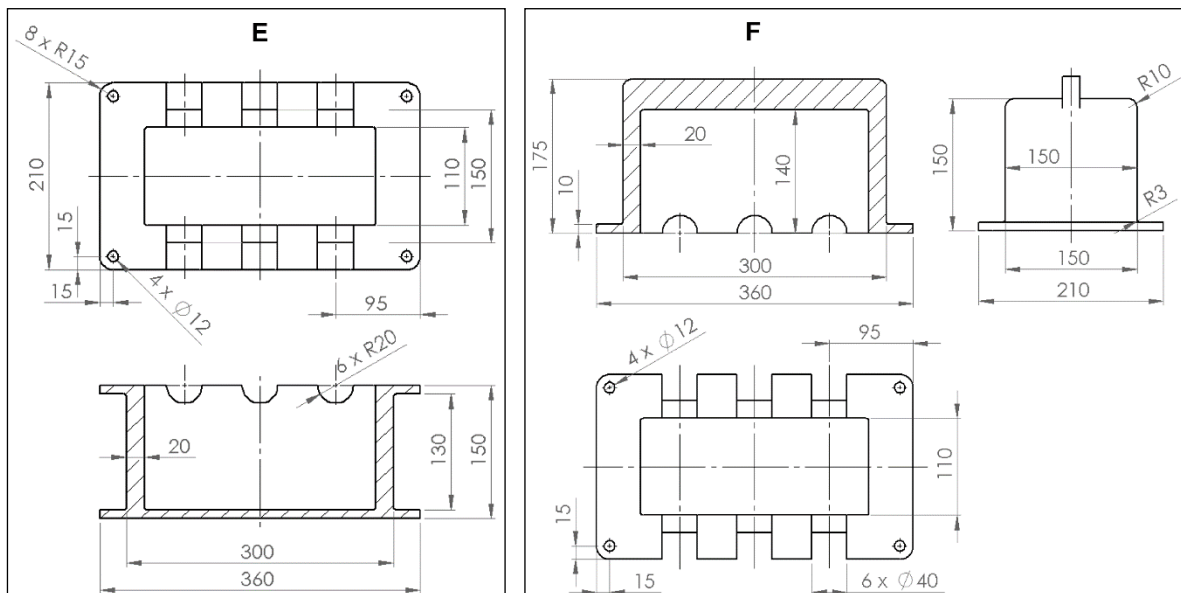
Dimensions of the lower (E) and upper (F) part of the gearbox
